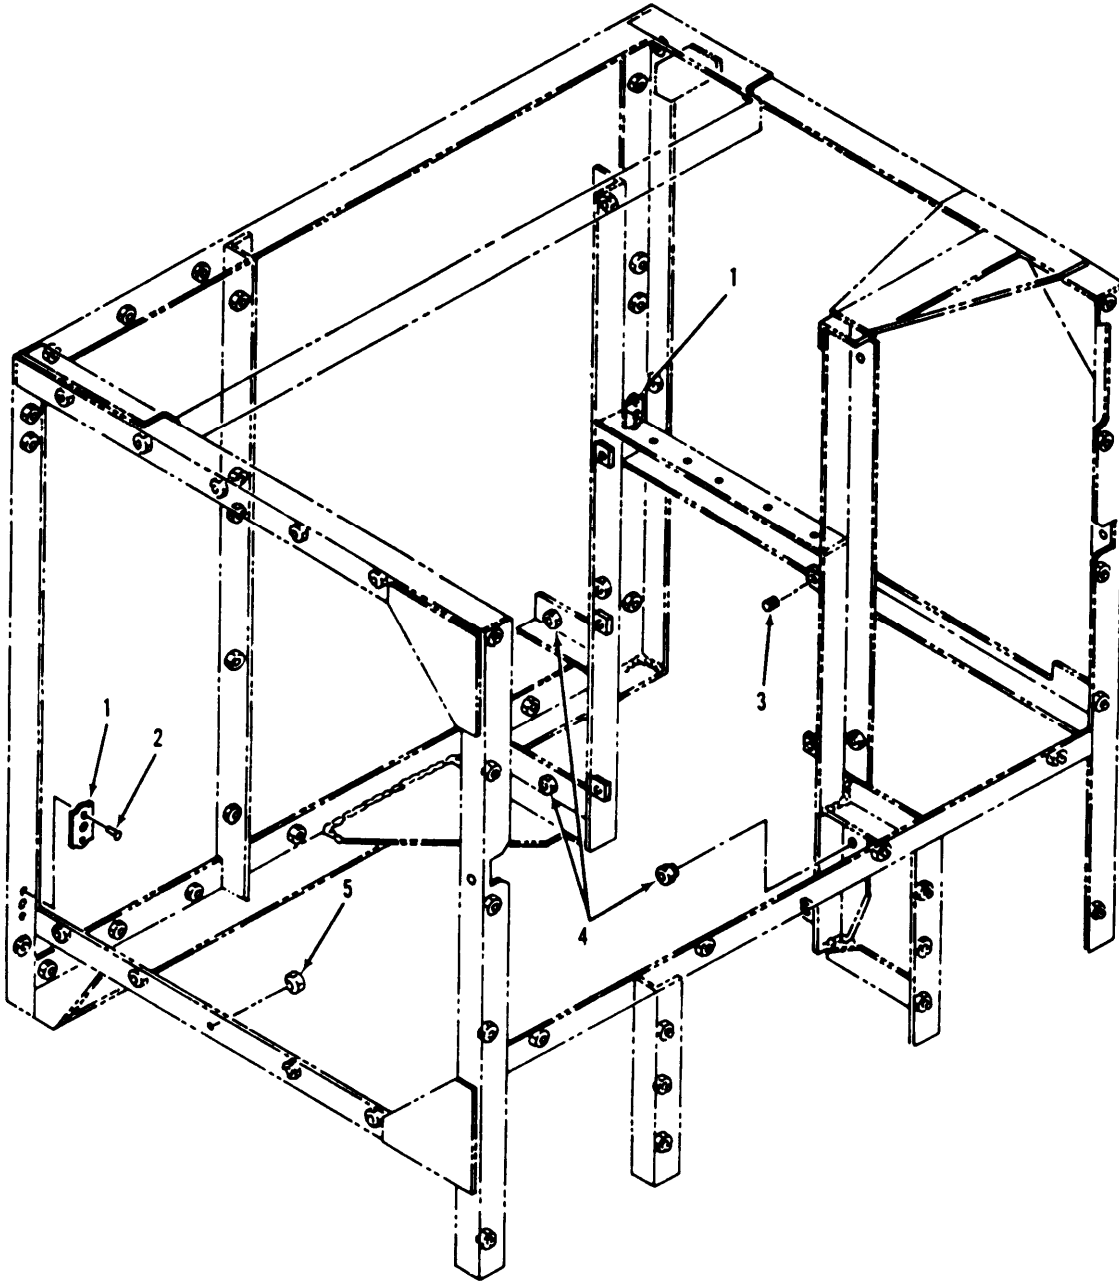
CHASSIS ASSEMBLY COMPONENT PARTS
